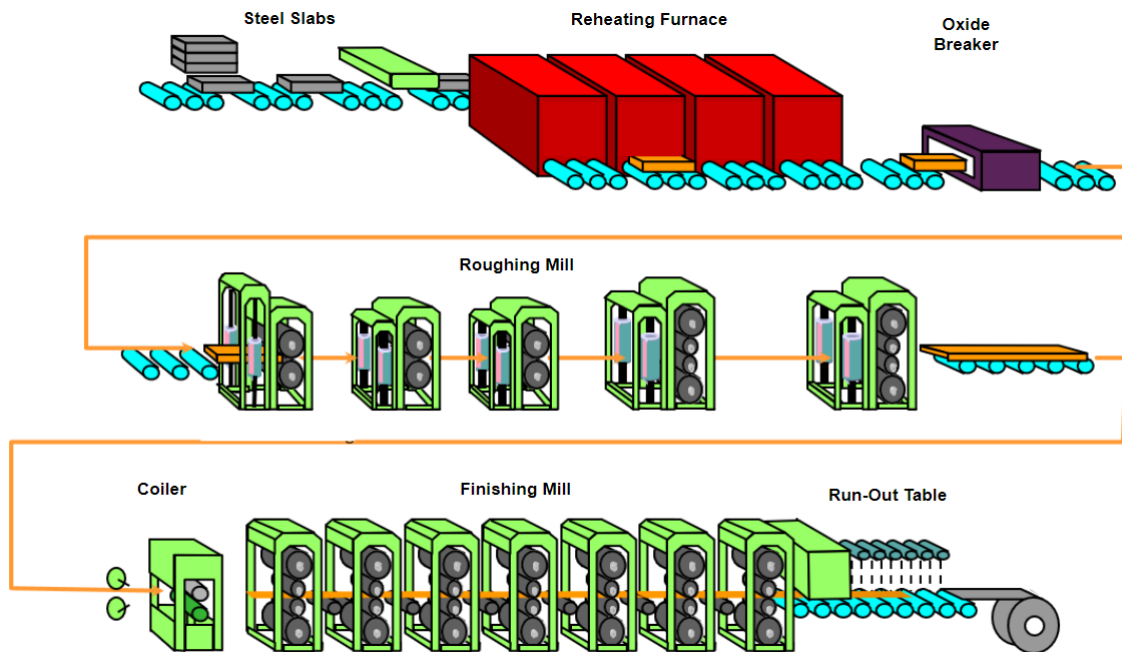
Schematic layout of hot strip mill, adapted from [25]
